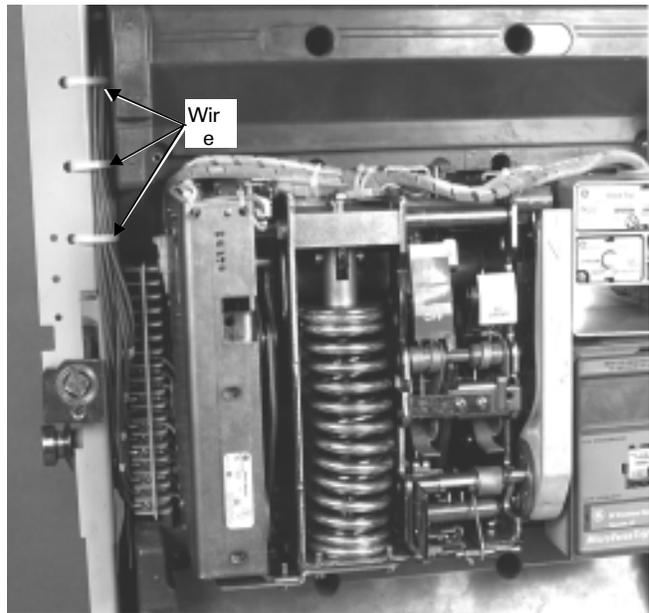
Motor Operator Mechanism installed in the breaker, showing the side panel reattached and the cable ties replaced on the wires connecting the terminal block to the secondary disconnect.
